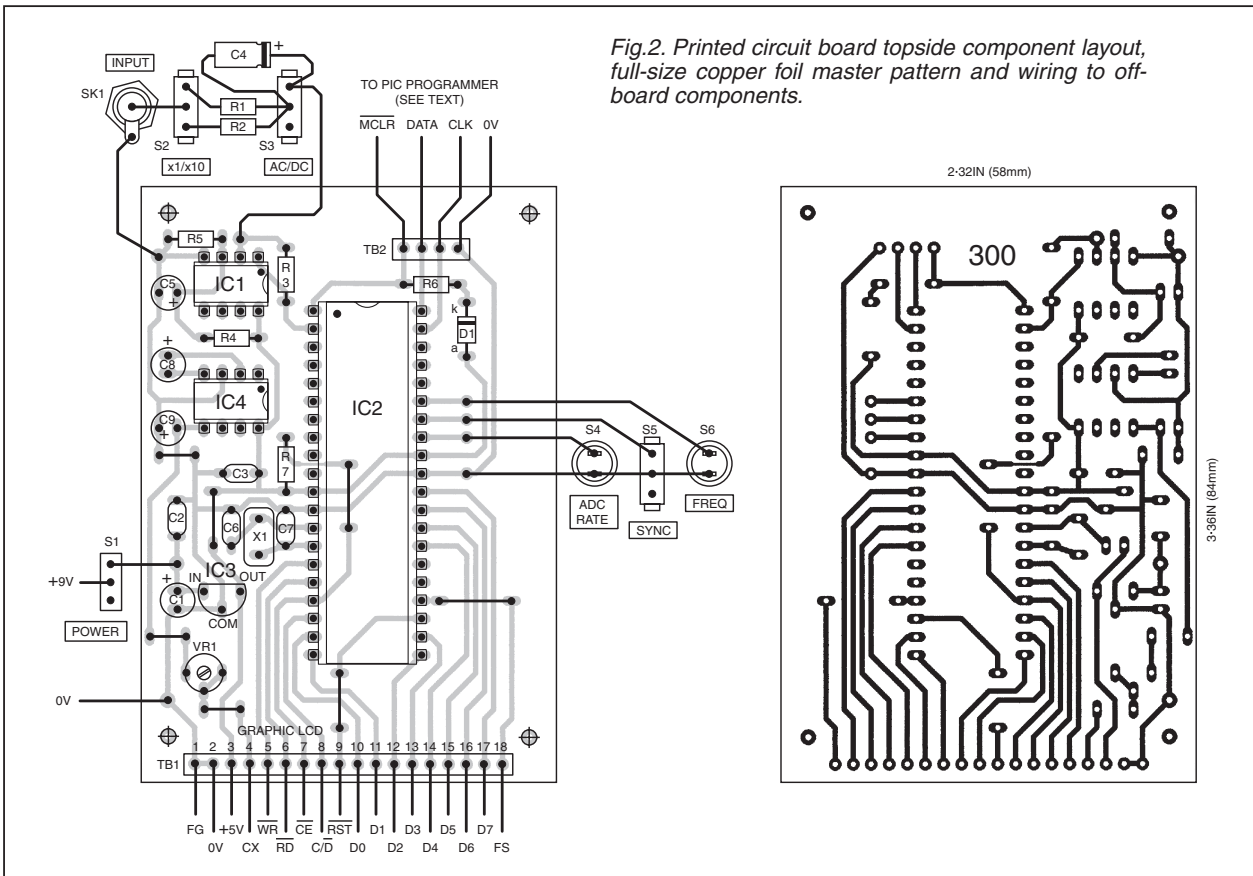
Printed circuit board topside component layout, full-size copper foil master pattern and wiring to off-board components.
